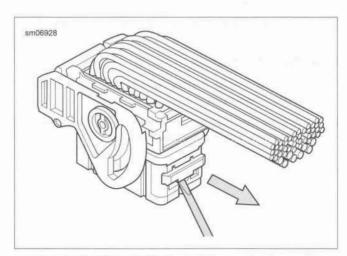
Molex CMC Sealed Connector Secondary Lock
